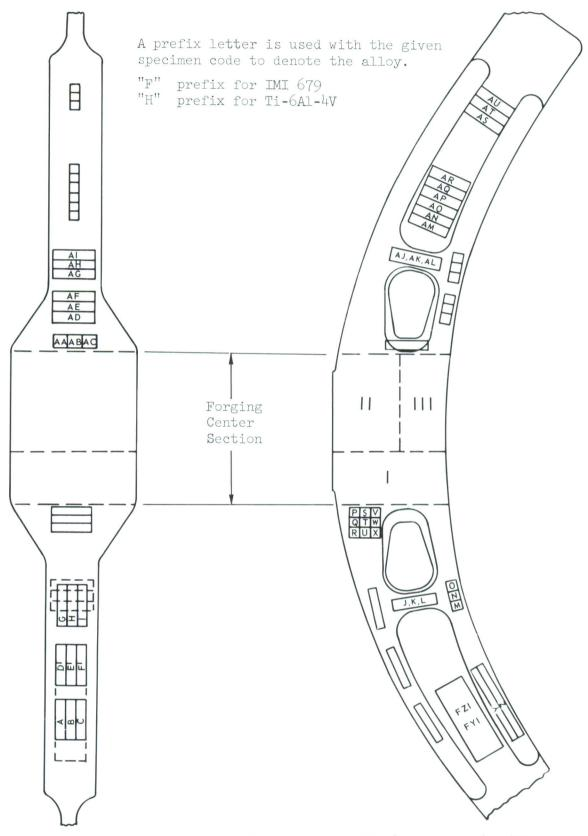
Specimen Layout First Forging IMI 679 and Ti-FA1-4V
